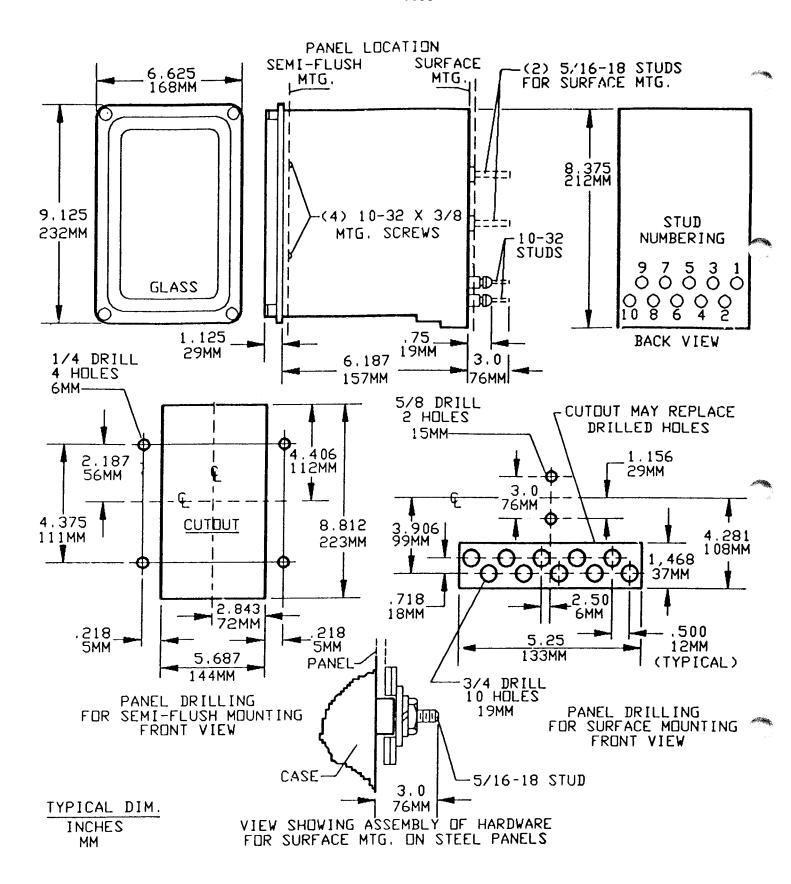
(K-6209271-8) Outline and Mounting Dimensions for the S1 Case
